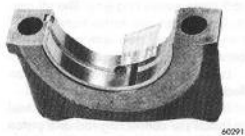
Checking Main Bearing Clearance with Plastigage
